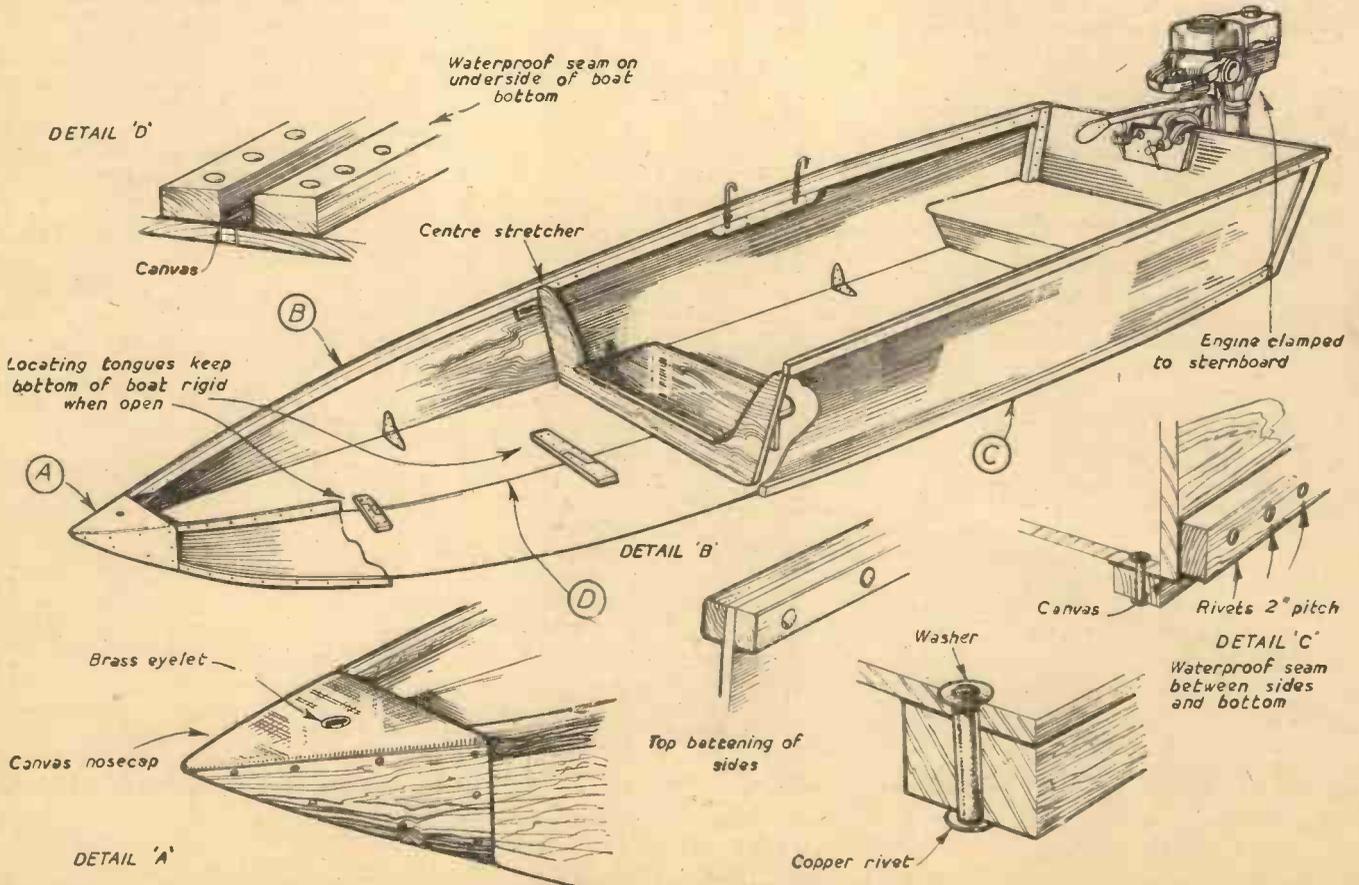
Perspective sketch of the finished boat, and details of the various joints.
